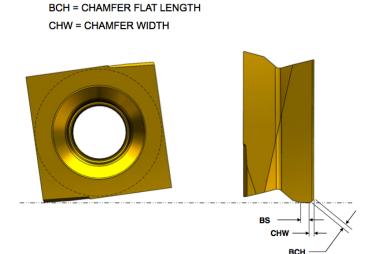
Cutting Tool Measurement Diagram 6 (Cutting Item – ISO 13399)
